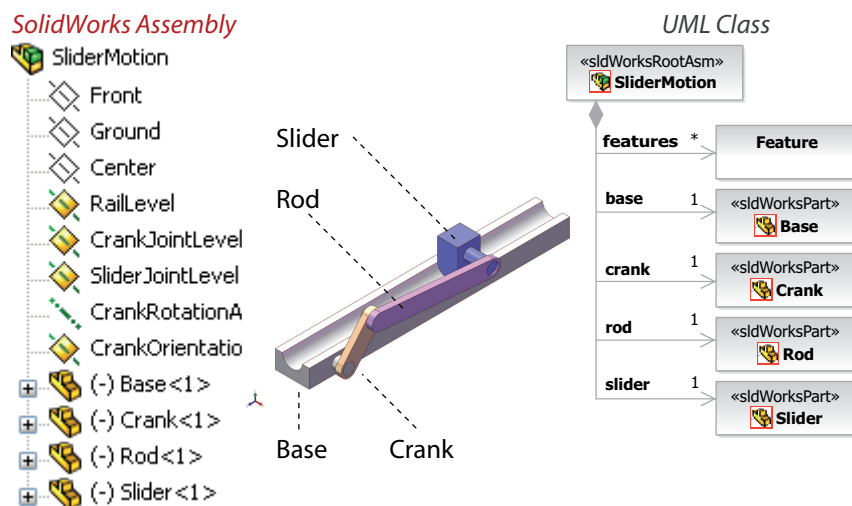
SolidWorks assembly model of the slider-crank mechanism
